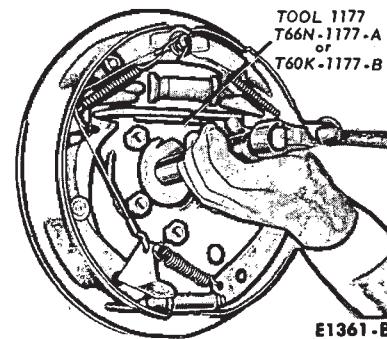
Installing Rear Wheel Bearing Oil Seal
